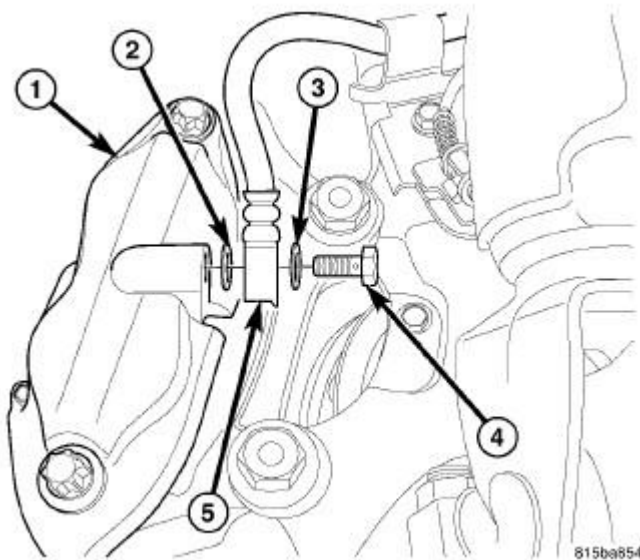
FLEX HOSE CONNECTION AT CALIPER
